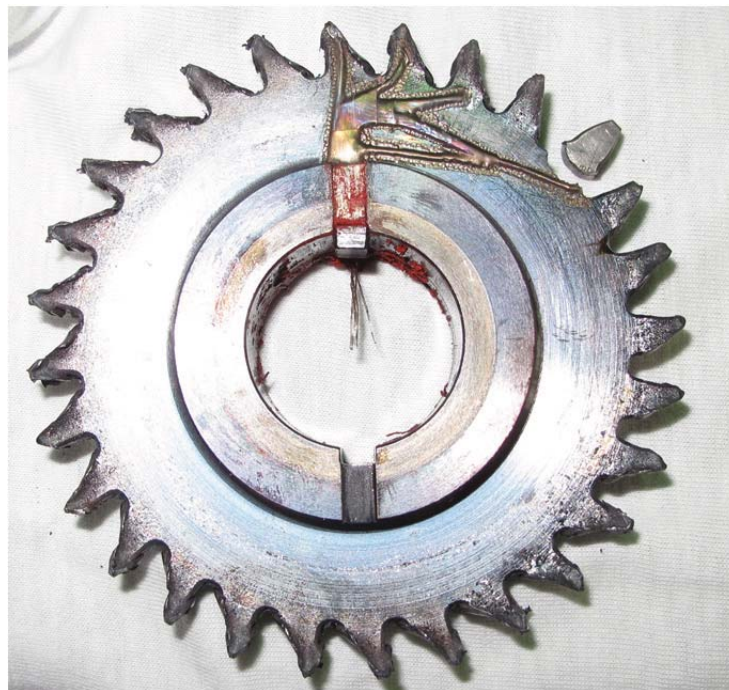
Instrumented spur gear post-loss-of-lubrication test condition.
